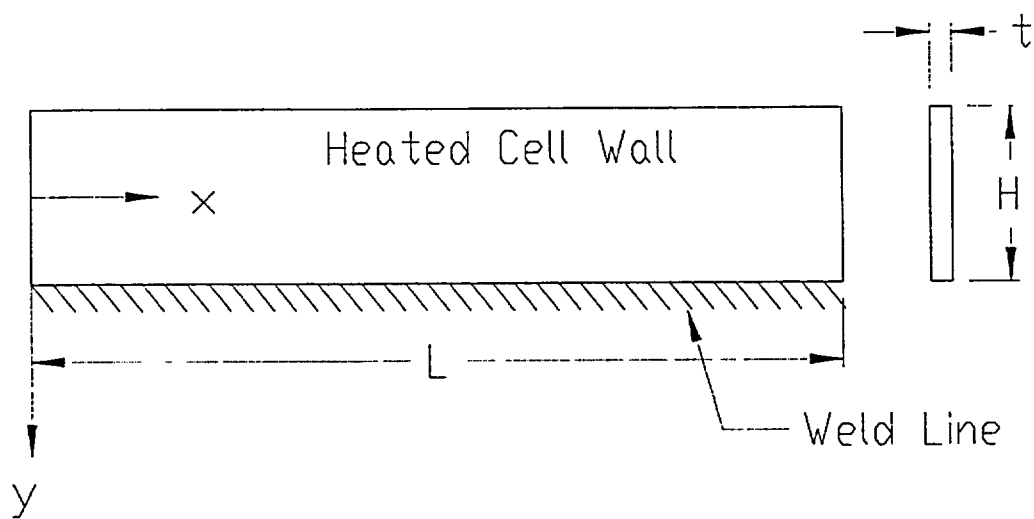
; WELDED JOINT IN RACK
